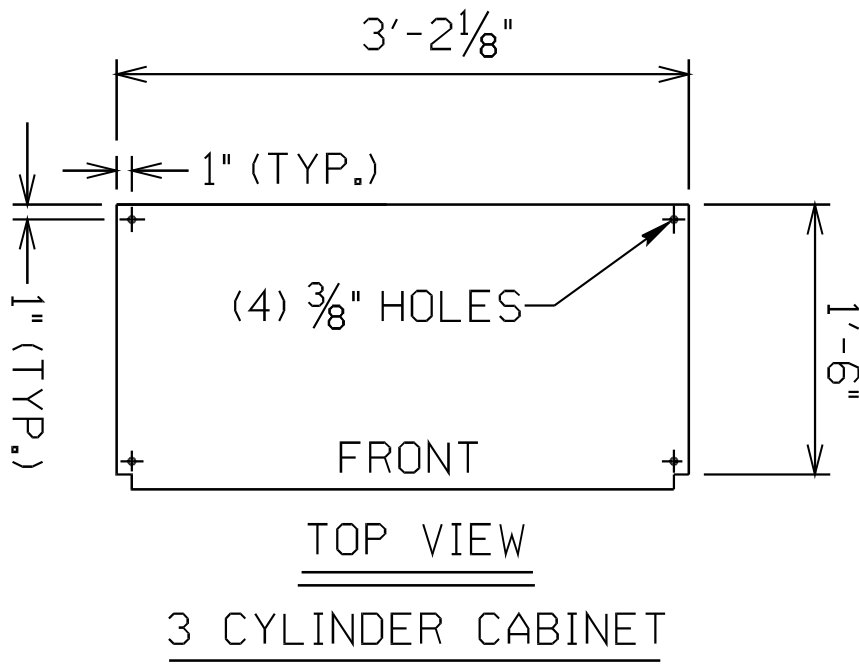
Mounting Hole Locations for 3 Cylinder Cabinet
